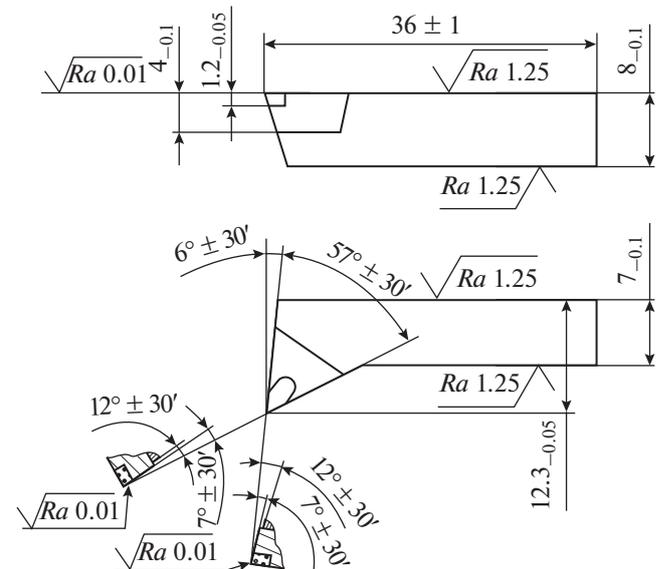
Diamond cutter for matrices used in the manufacture of Fresnel prisms.
